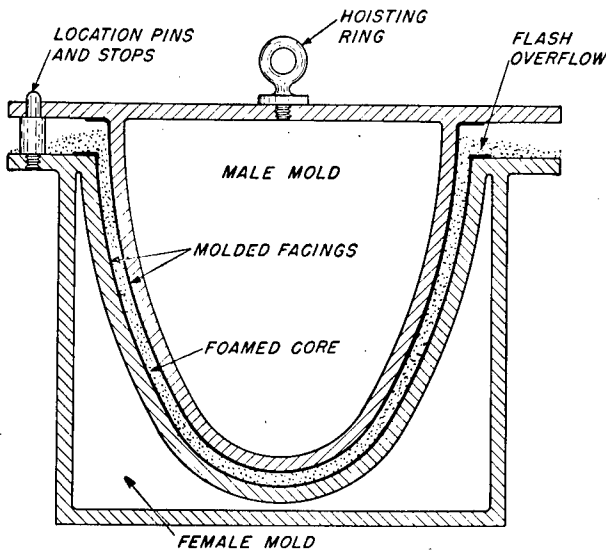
Diagrammatic sketch of a heated mold for use with poured cores.
